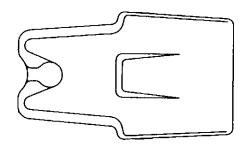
Taper-Fit Tooth Retained with "horseshoe nail" type fastener. Drive out tooth with punch to remove. Install new tooth, secure with "horseshoe nail" type fastener. DO NOT hit carbide face with hammer.
